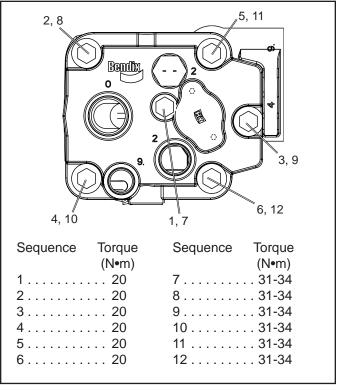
CLOSED ROOM COMPRESSOR HEAD BOLT TORQUE SEQUENCE.
